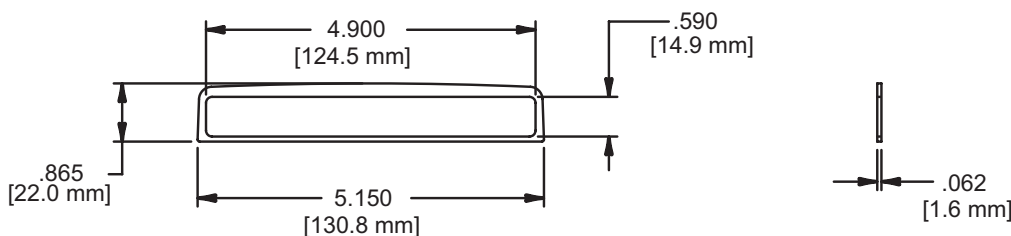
MAXIM OPERATOR GASKET APPLICATOR 31883
